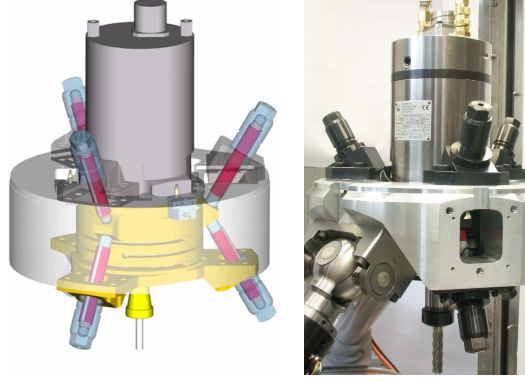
The adaptive spindle support: CAD-model (left) and real component mounted on the test bench (right). (Courtesy of Fraunhofer IWU, Dresden.)
